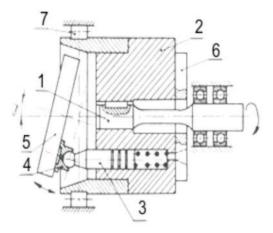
General scheme of axial multi-piston pump: 1 – shaft, 2 – rotor, 3 – piston, 4 – piston shoe, 5 – swash plate, 6 – valve plate, 7 – bearing [6]
